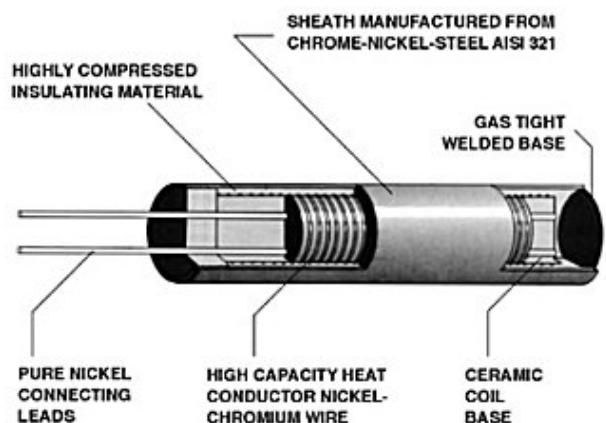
CARTRIDGE HEATER CONSTRUCTION
